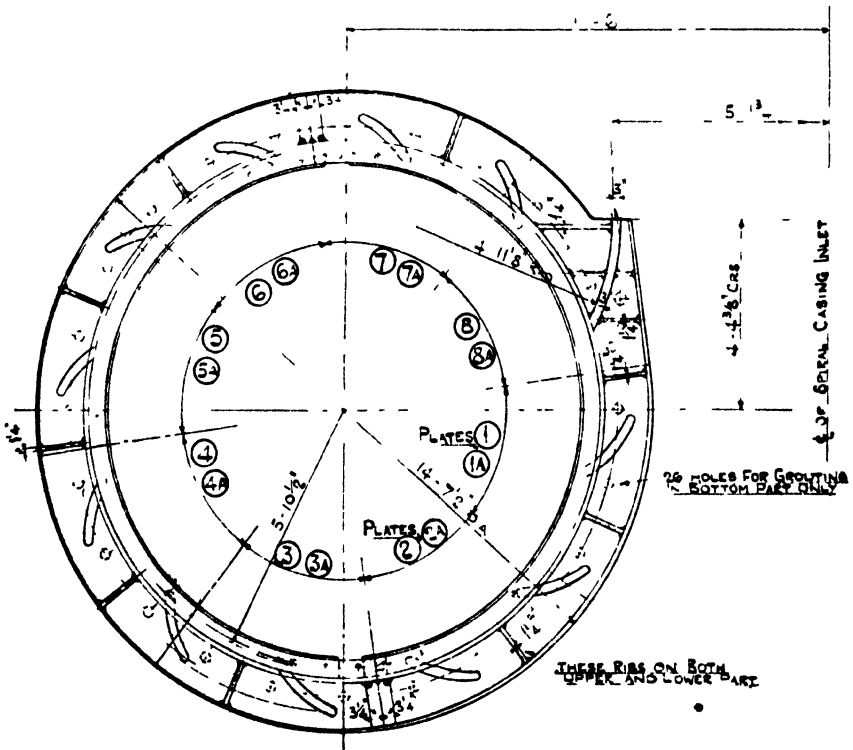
Plan view of welded stay ring for 30,000 horsepower water turbines, 1942 units.
